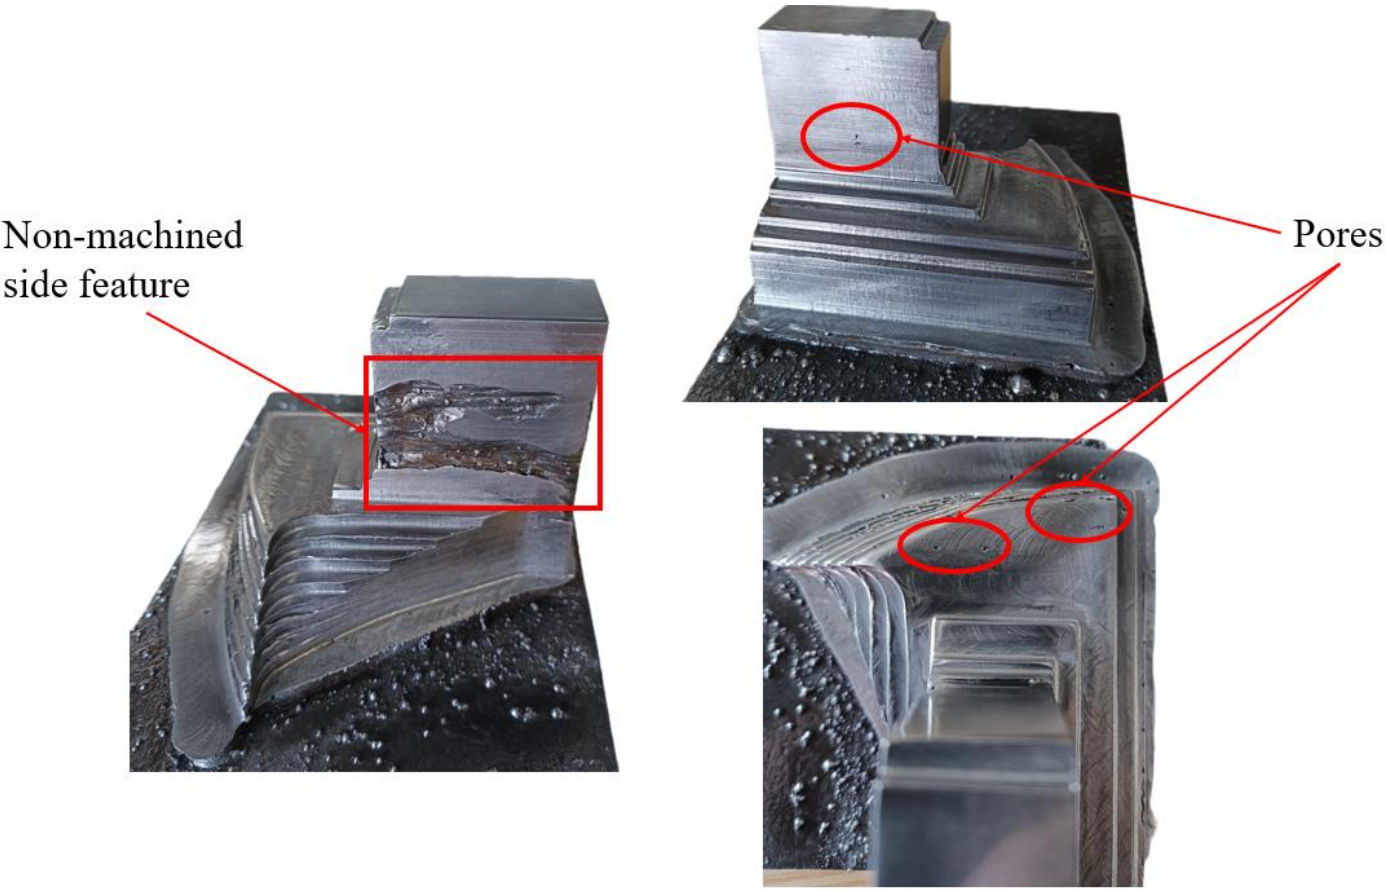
Imperfections detected by visual inspection of the machined part.
